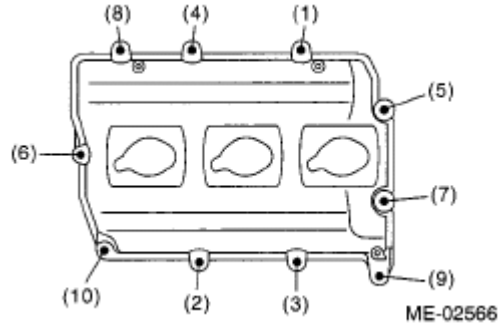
Identifying Rocker Cover Bolts (RH Side)
